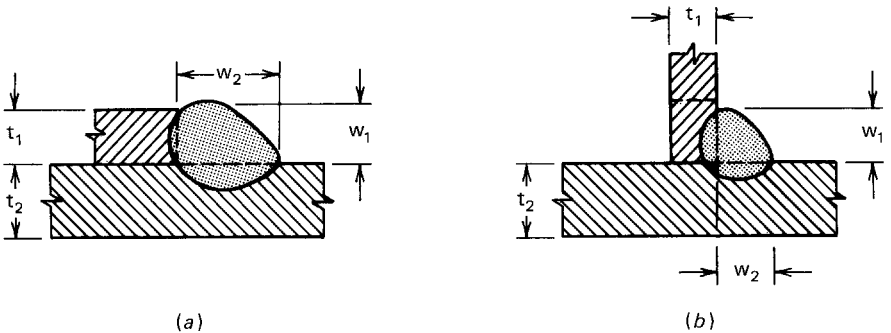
Leg sizes of fillet welds.^{1,4} (a) Lap joint. (b) T-joint.
